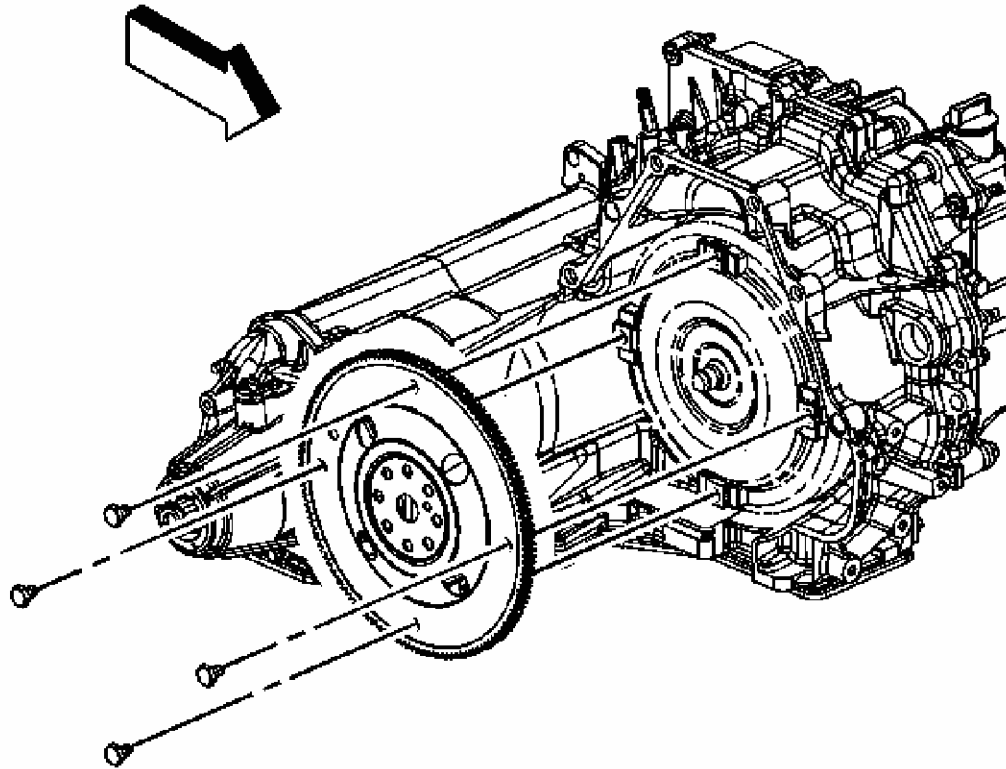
Identifying Flywheel-To-Torque Converter Bolts
